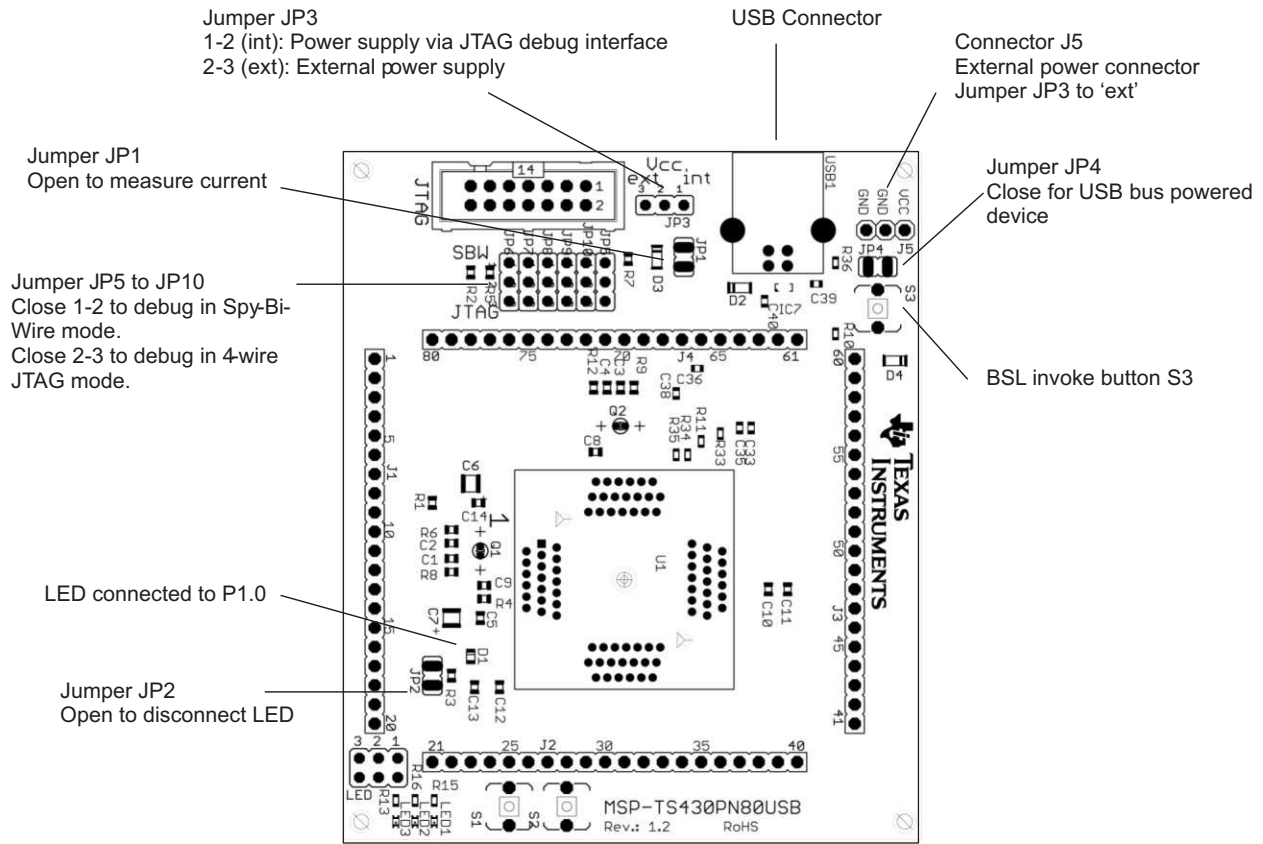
MSP-TS430PN80USB Target Socket Module, PCB
